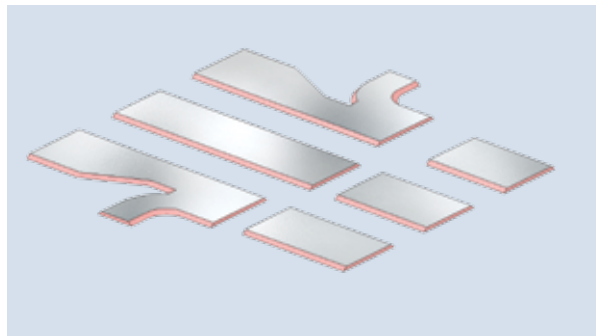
Component Pieces of a Two Way Dynamic 'Y' Branch with Radius Elbow
